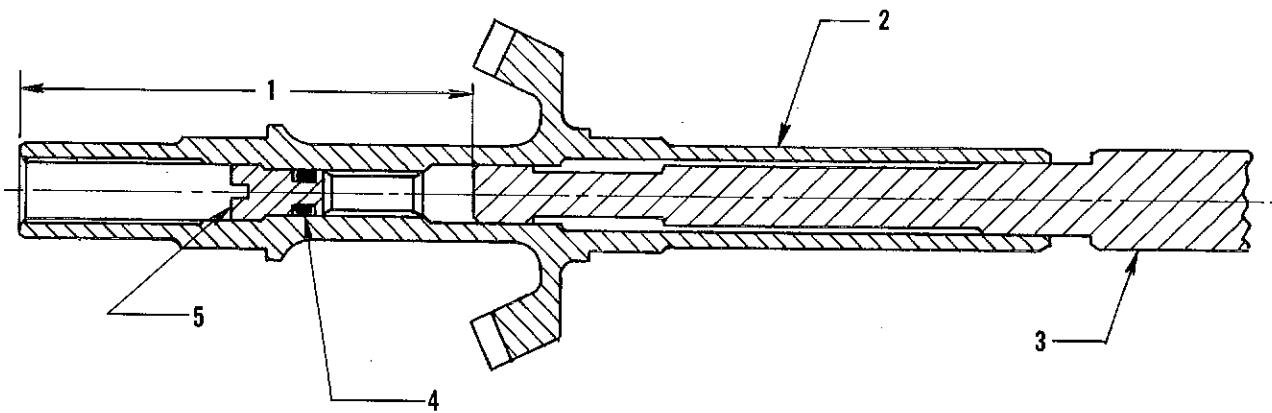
G-9. Fuel Control Flexible Shaft Assembly
